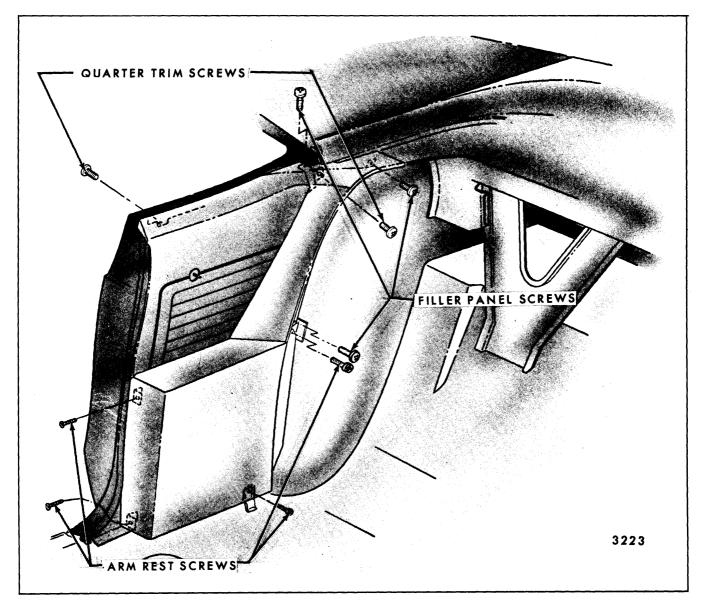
Rear Quarter Trim Assembly - "39487" Style
